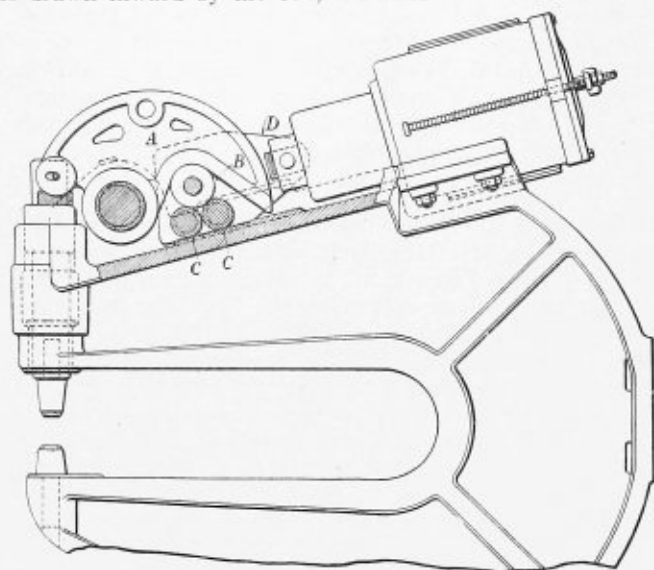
Sectional View of Riveter Showing Operating Details of the Machine
